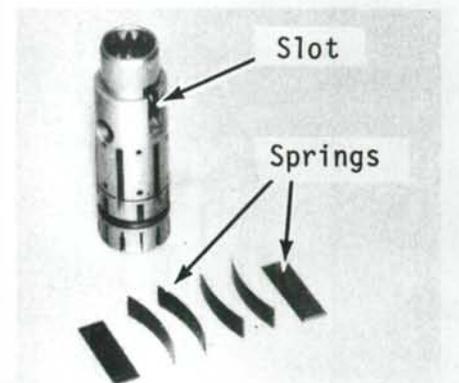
Assemble centering springs with arches facing one another and insert through slot in sleeve and spool. See Fig. 57.
